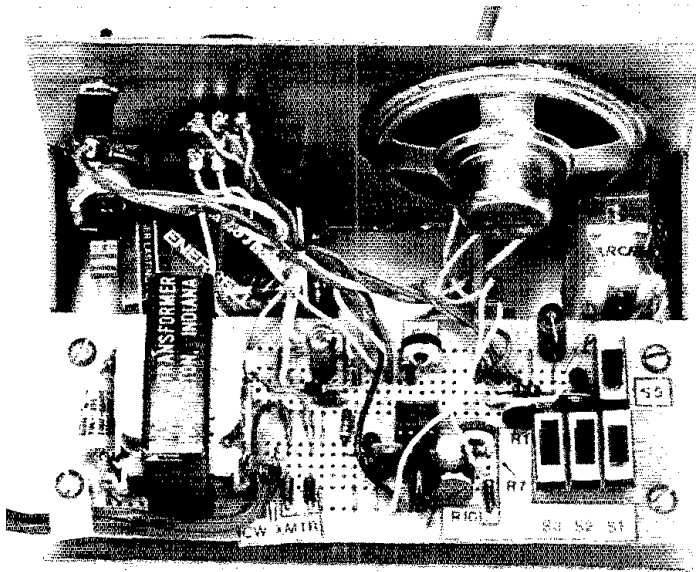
A close-up of the component layout. The components should be identified easily in the schematic, with a bit of study.
